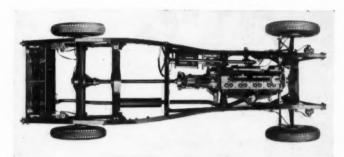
Chassis construction employing a channel reinforcement in front of side rail
